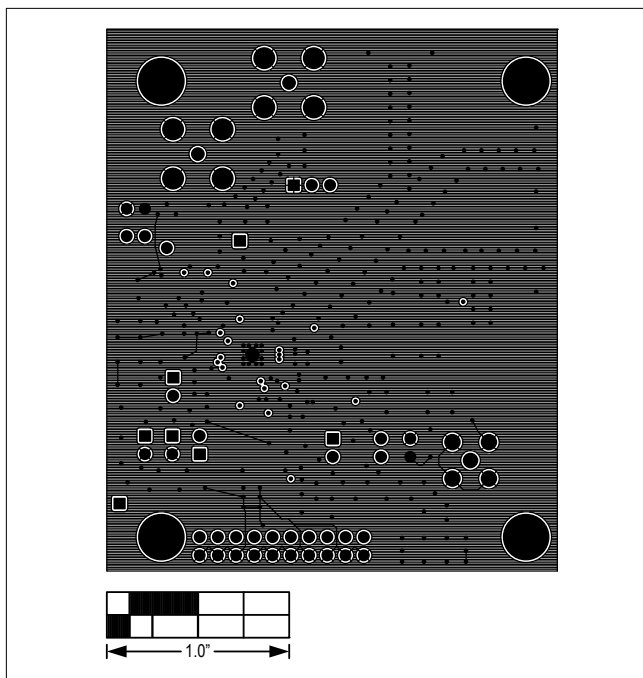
MAX2150 EV Kit PCB Layout—Layer 2
